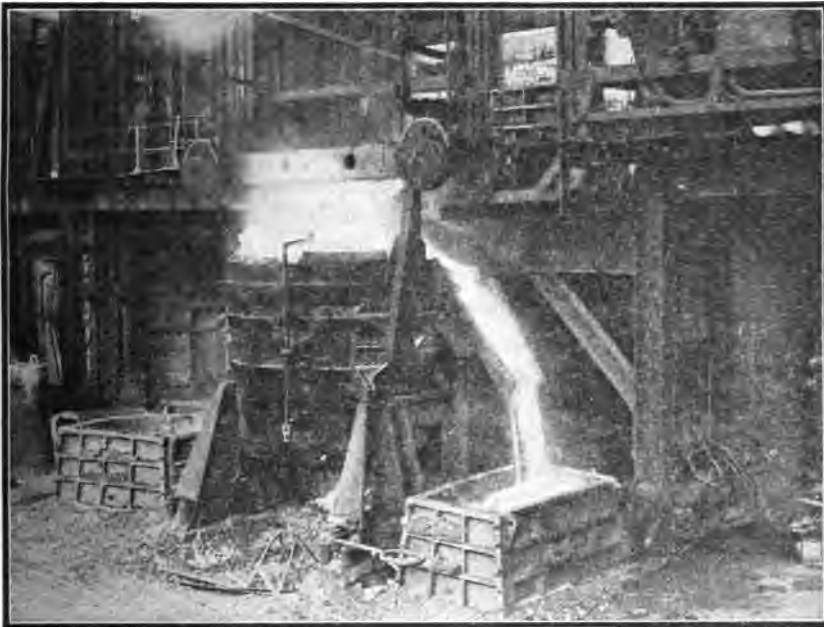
Open-hearth pouring in a great Pennsylvania steel manufacturing plant.
